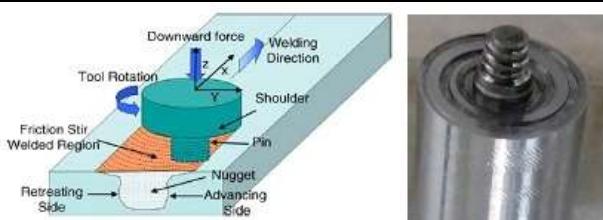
Schematic Sketch of Friction Stir welding showing the Various Characteristic Regions and tool
